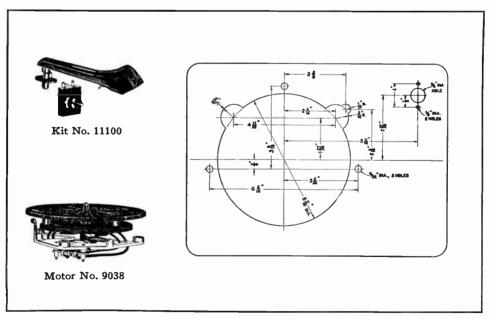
Motor Board Layout showing dimensions and location of all holes required for mounting Stock No. 11100 Kit and Stock No. 9038 Motor.
